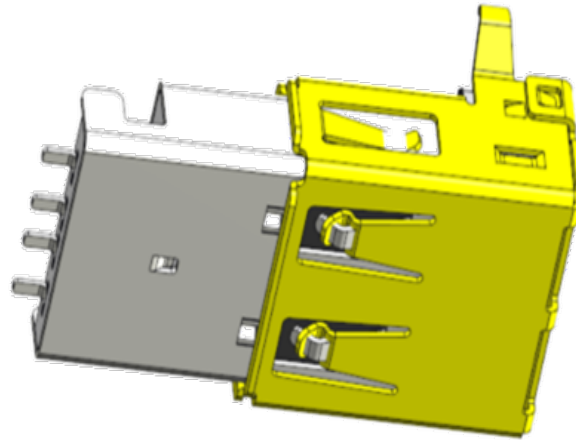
B: USB Assembly with Male/Female Spring-Tab Housings Coupled Together
